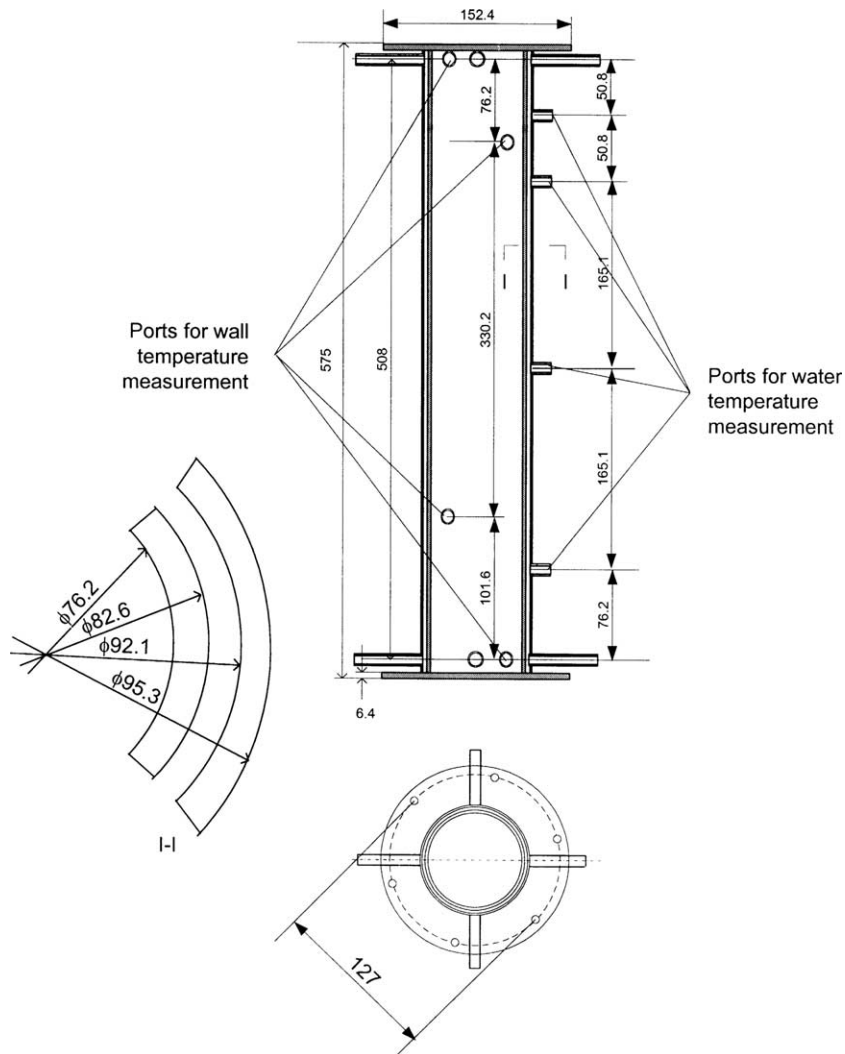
Concentric-tube heat exchanger. All dimensions in millimeters.
